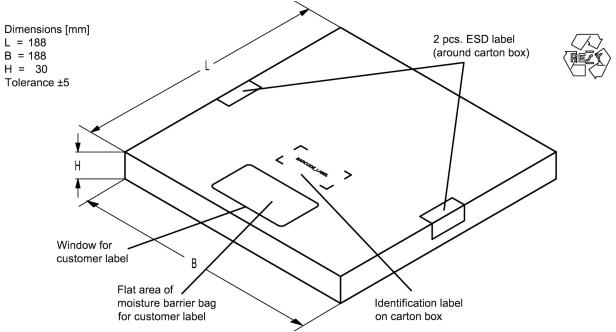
Drawing of folding box for reel with diameter of 180 mm.
